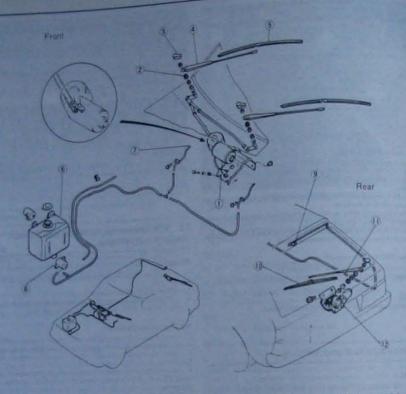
Exploded view of the windscreen, and taligate wiper and washer components – pre-September 1985 Hatchback models (Secs 22 to 25)
